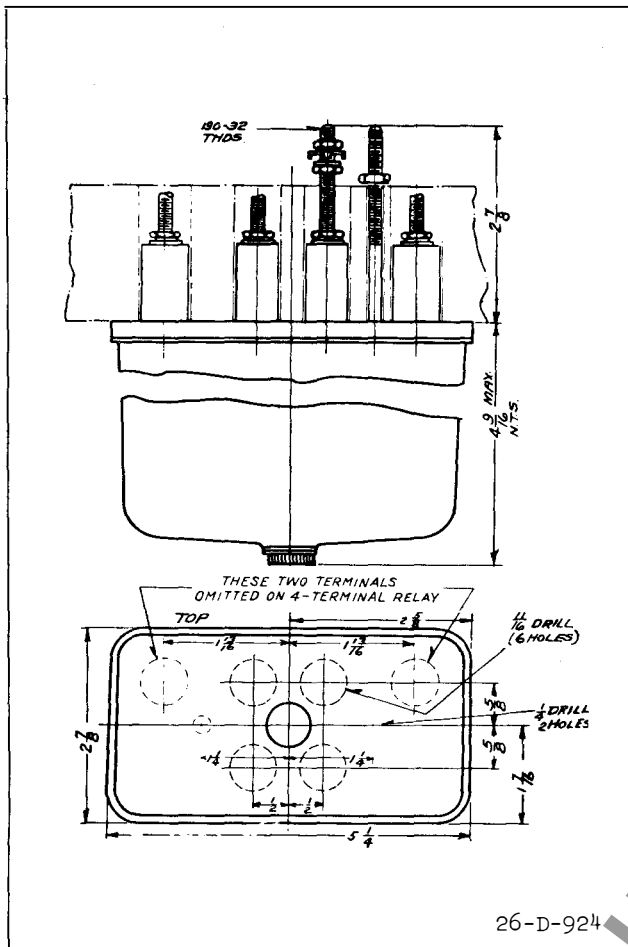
Outline and Drilling Dimensions of Type TD Relay.
